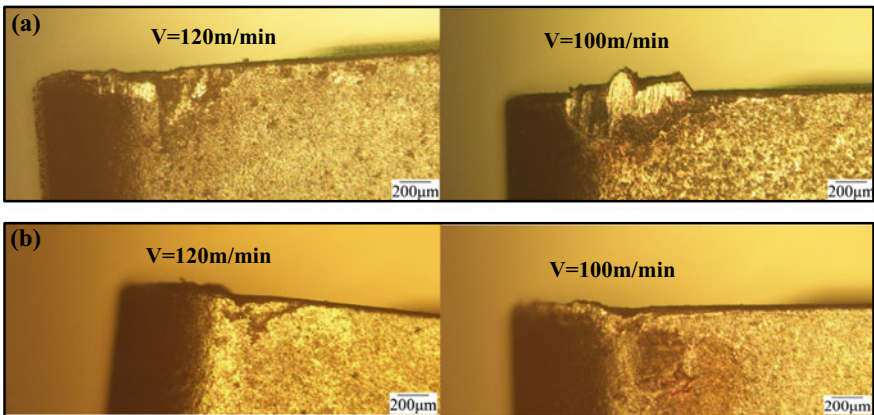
Microscope images of the cutting insert for a dry machining and b wet machining
